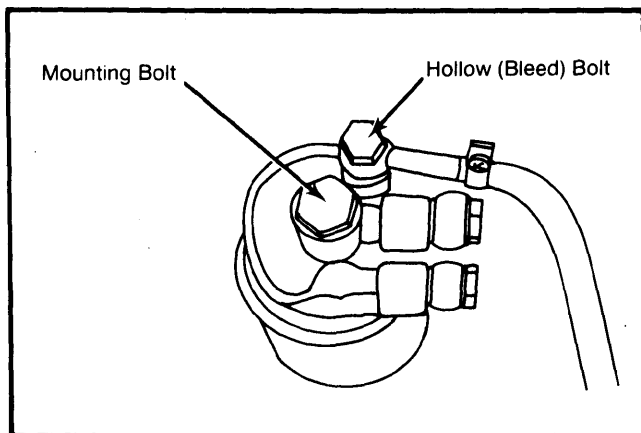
Removing, Installing and Bleeding Fuel Filter
